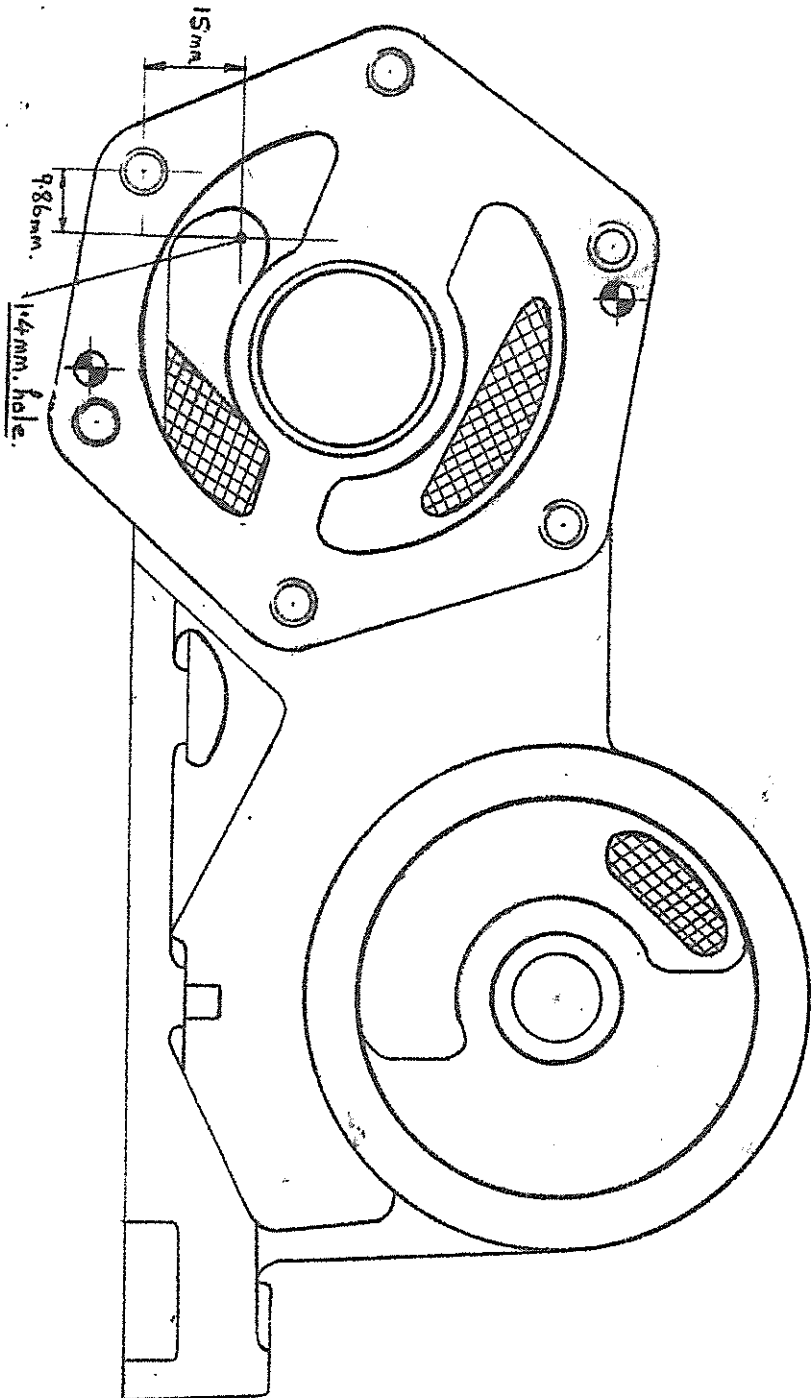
LOCATION OF AUXILIARY HOUSING AIR BLEED HOLE.
